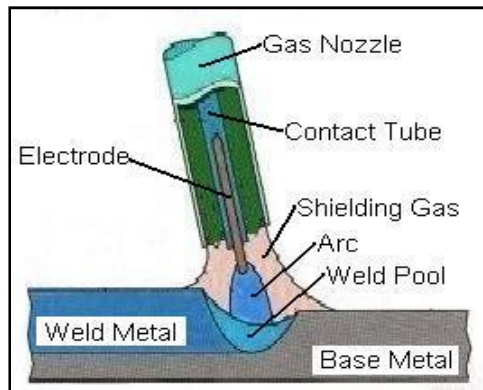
Schematic of Metal Inert Gas (MIG) Welding
